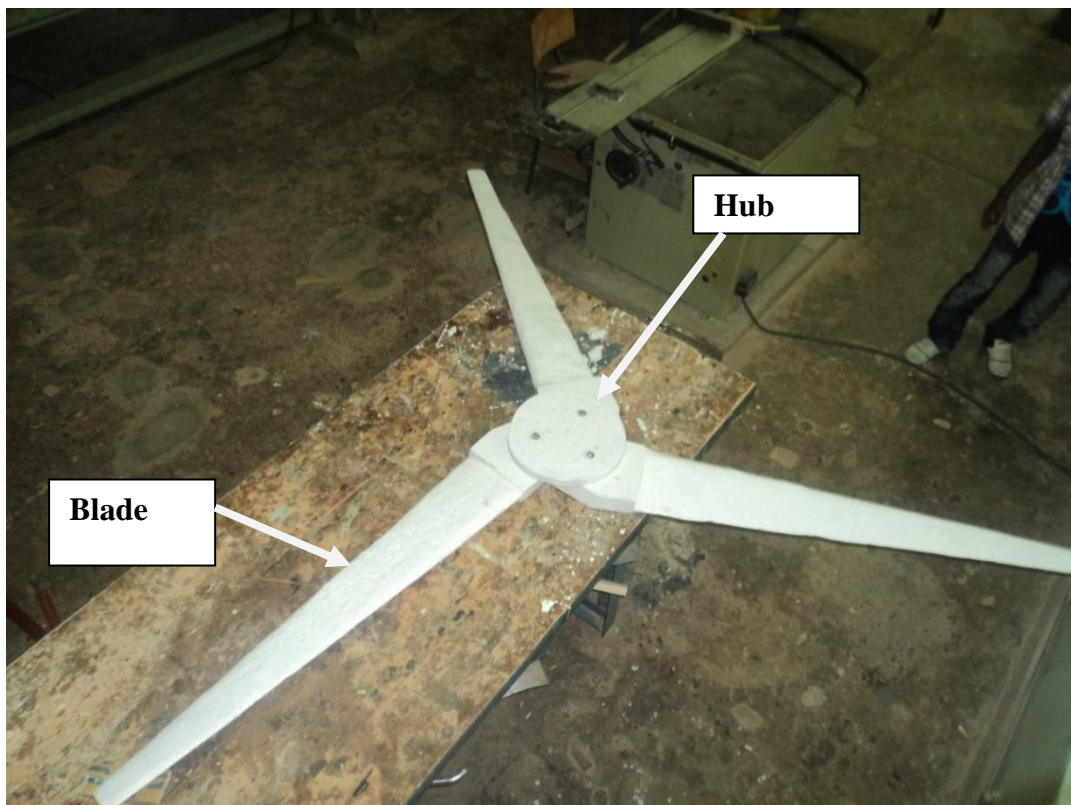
Photo of Blade Hub Assembly of the Prototype
